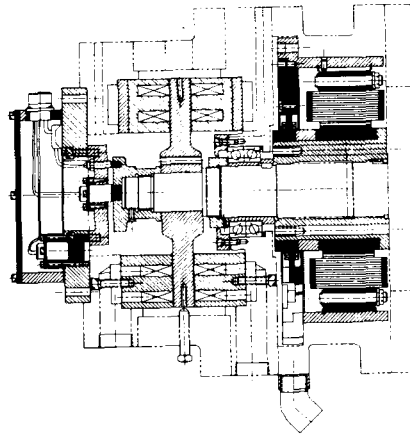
RADIAL AND AXIAL MAGNETIC BEARING ON NONDRIVE END OF PUMP.
